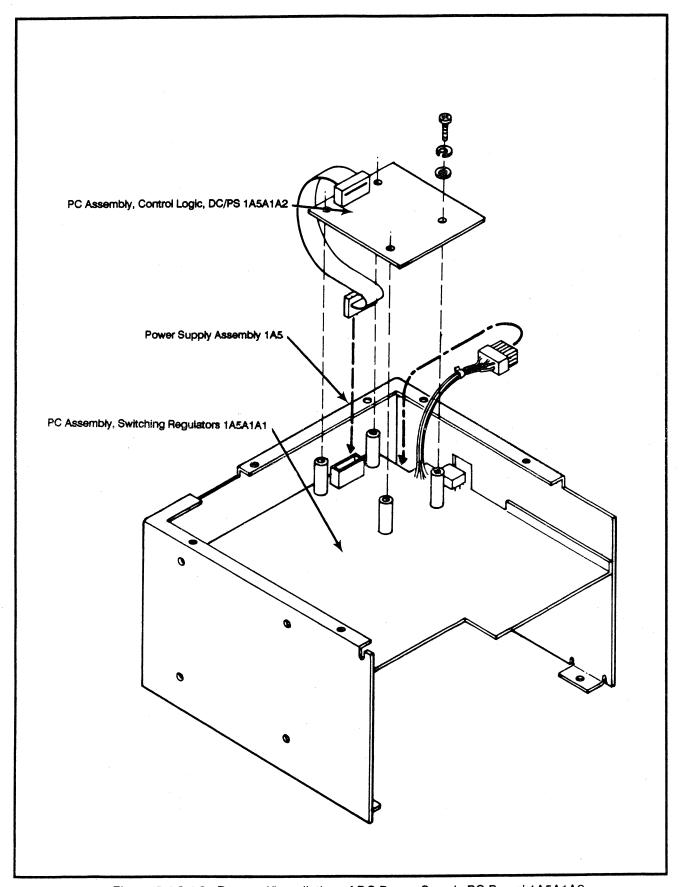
Removal/Installation of DC Power Supply PC Board 1A5A1A2.
